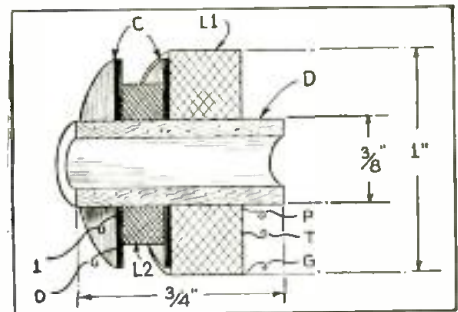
Coils L1 and L2 are wound on the same coil form. Winding L1 is a honeycomb or "universal" winding with a tap as shown. Coil L2 is layer-wound between the washers, C, placed next to coil L1. The core may be either wood or impregnated paper. (This combination constitutes unit L in the schematic circuit, Fig. 1.)
